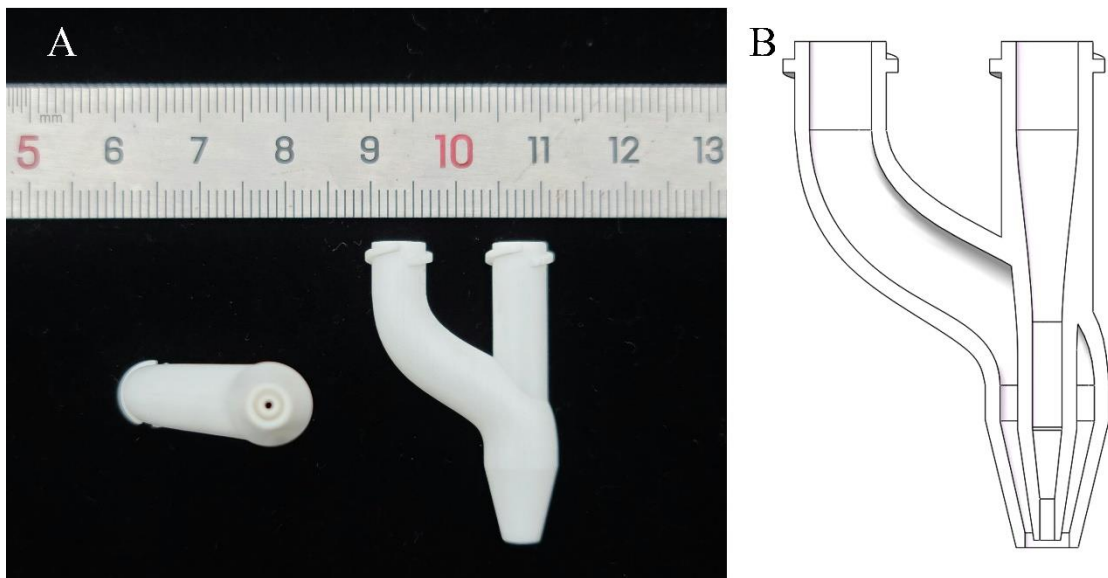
Coaxial nozzles manufactured by 3D ceramic printer. (A) Photo of coaxial nozzle-1-3. (B) Section view of coaxial nozzle-1-3 (exported from Solidworks 2016).
